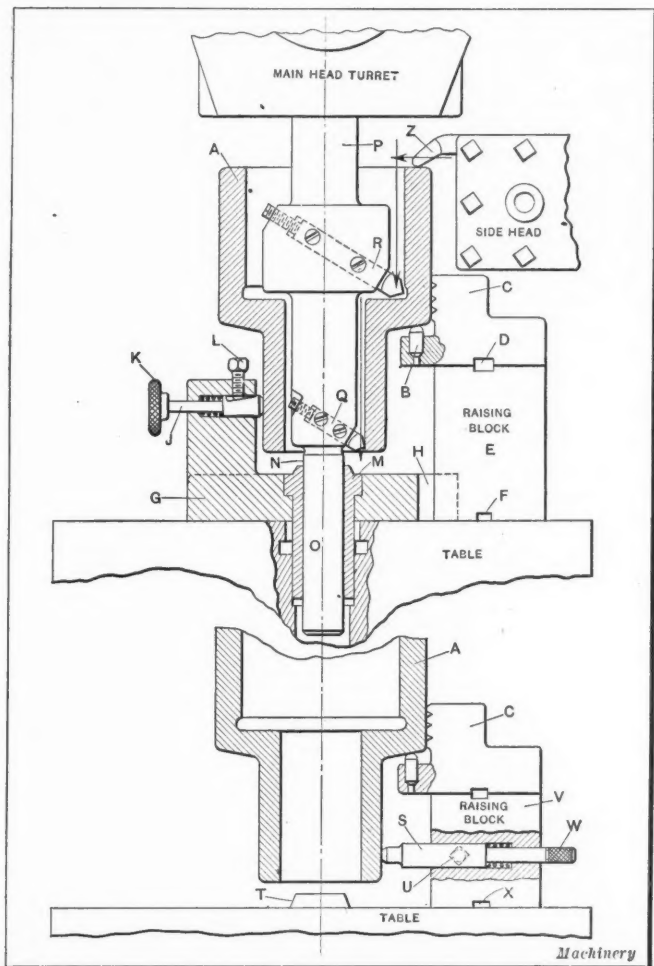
Original and Improved Methods of holding Large Hub Casting by Three-point Support
